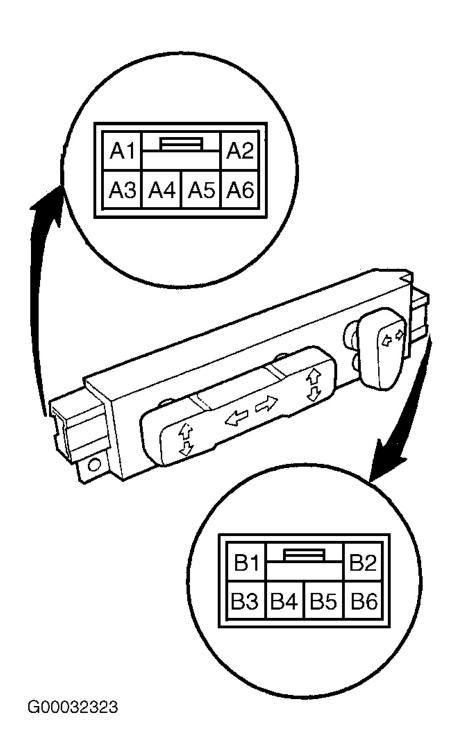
Identifying Driver's Power Seat Switch Connectors & Terminals Courtesy of AMERICAN HONDA MOTOR CO., INC.
